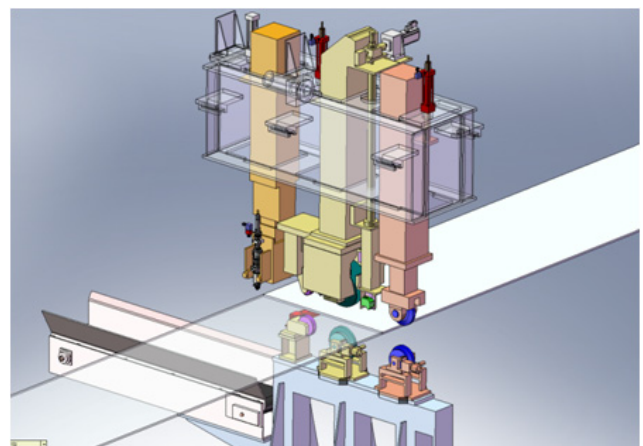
Upper and lower carriage consisting of a laser welding head, two laser cutting heads, a pilot roll and a planishing roll
